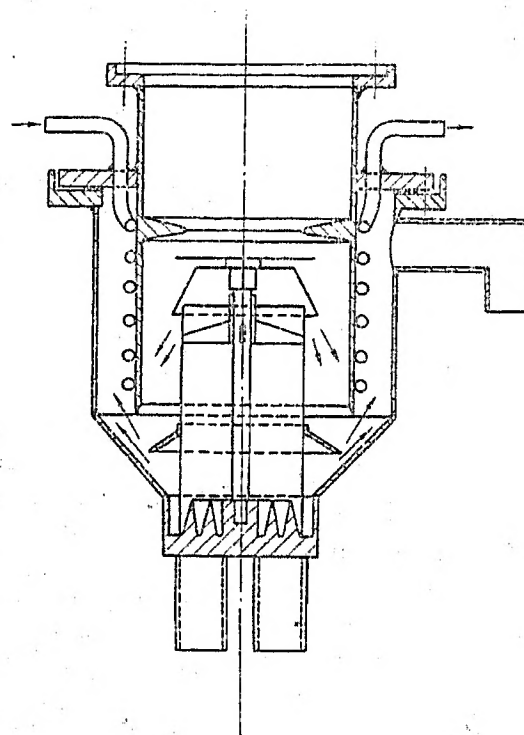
High-speed oil diffusion pump, Type 04B.
